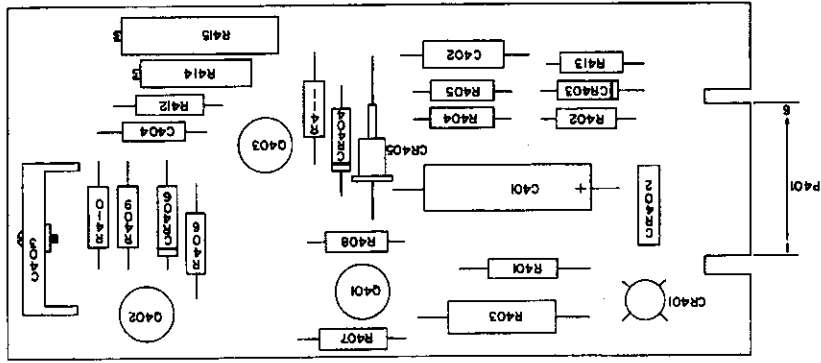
COMPONENT LOCATION, CHASSIS AND AUXILIARY BOARDS
